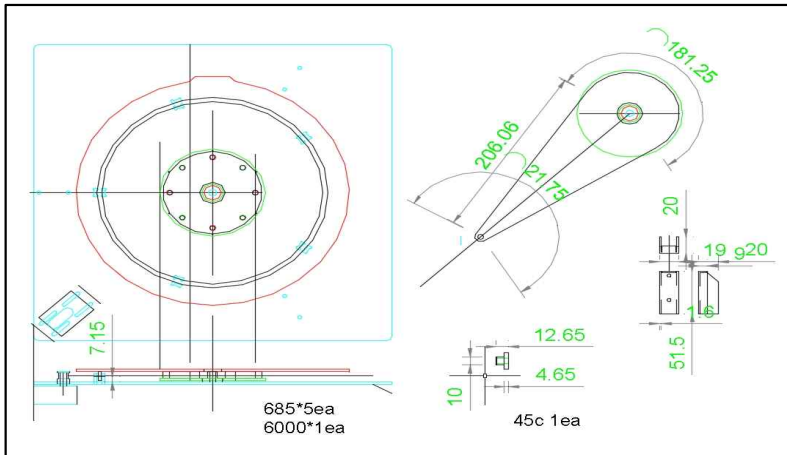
CAD drawing PV tracker azimuth structure (part1)
